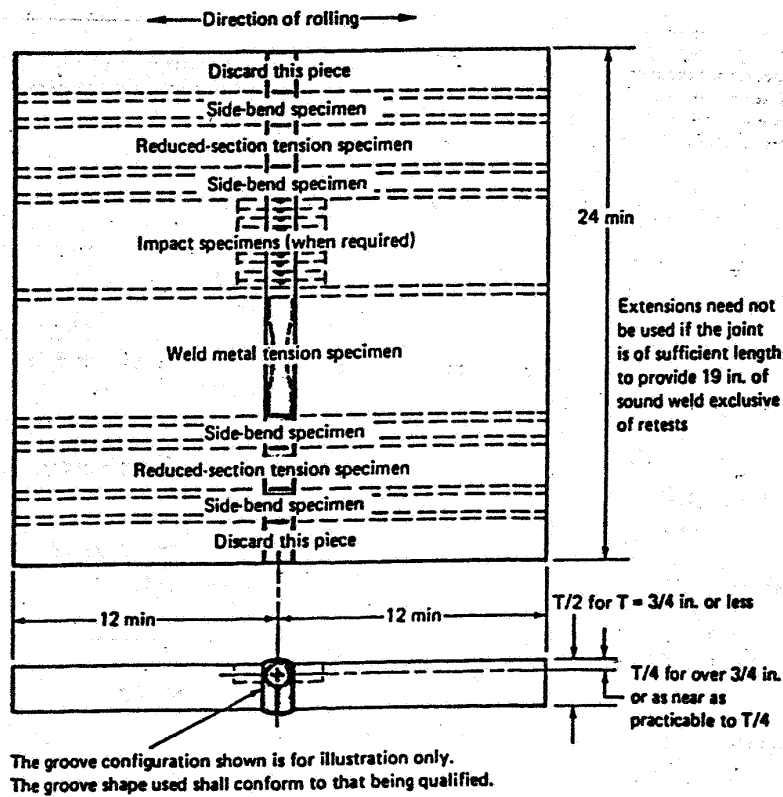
C—Location of test specimens on welded test plate—electroslag and electrogas welding—procedure qualification
